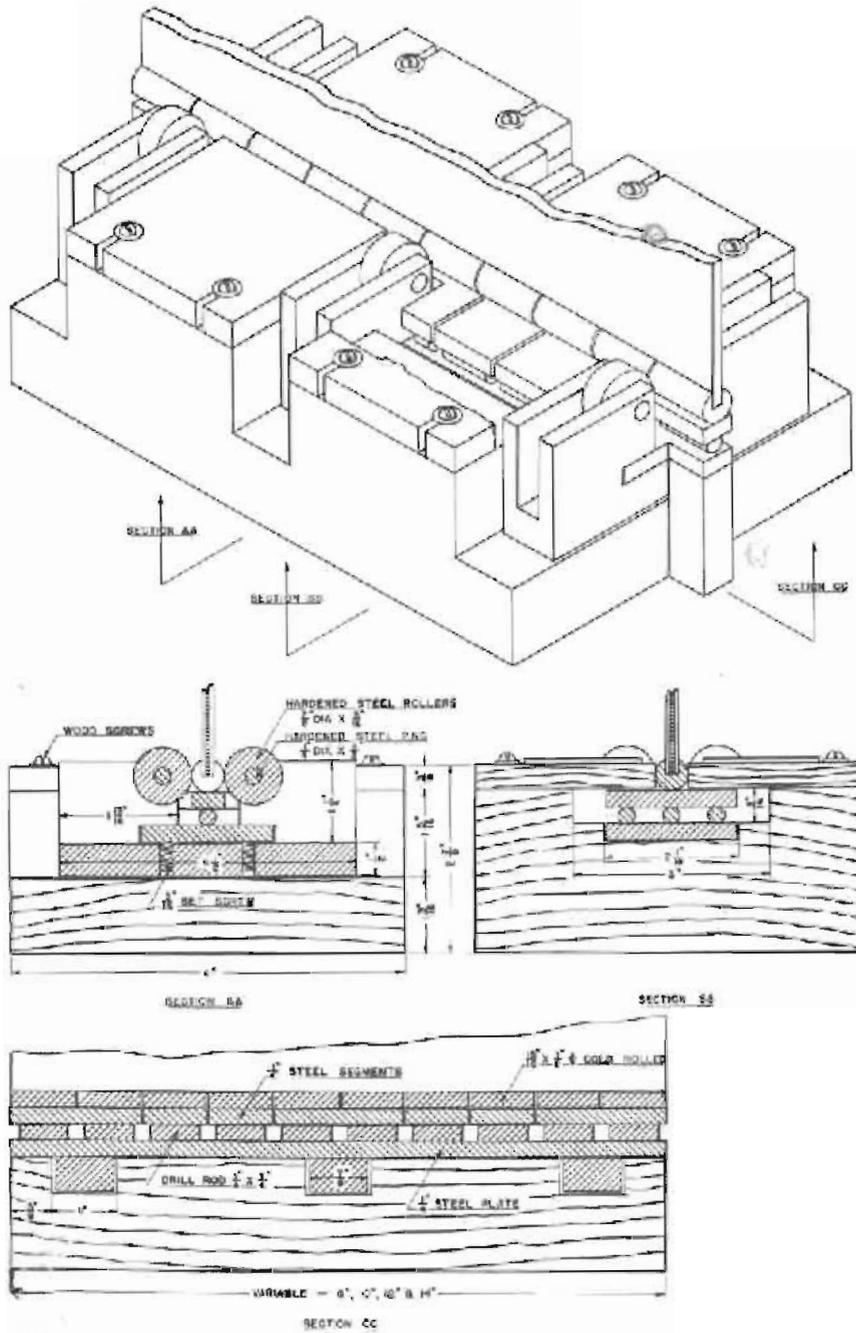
Design details of loading head used in tests of stiffened flat plywood plates.
